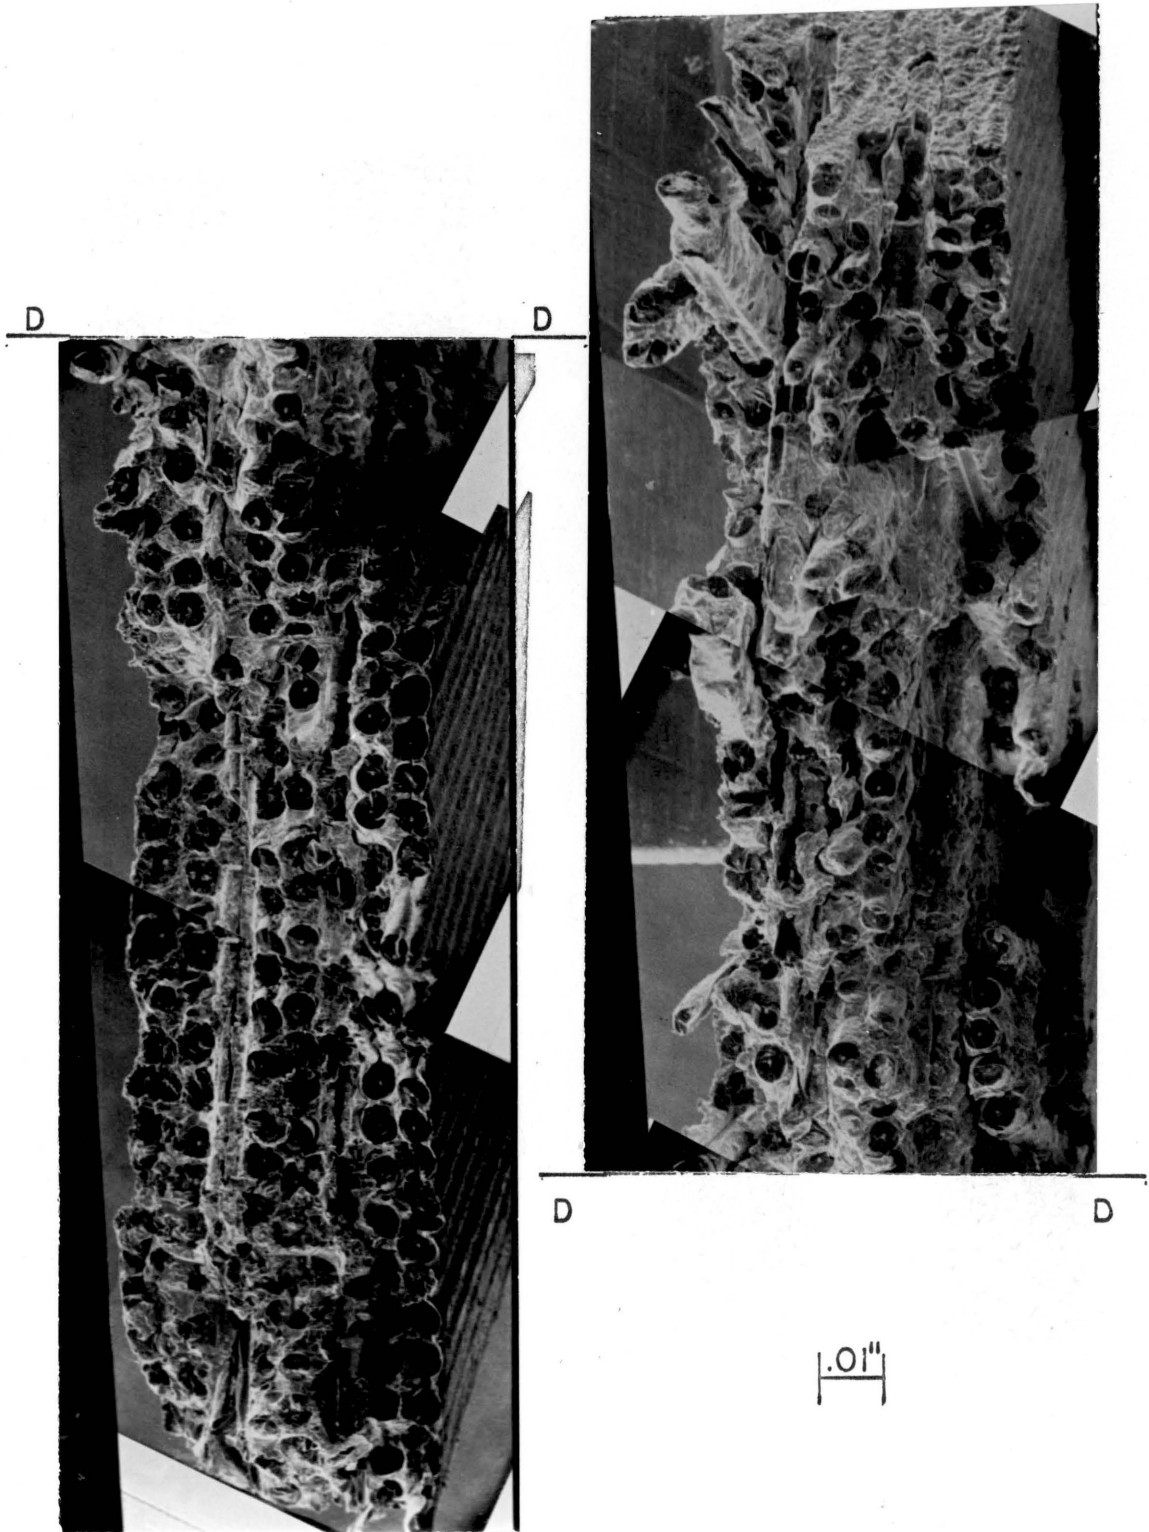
B/A1 Ib 15Hz fatigue fracture surface.
